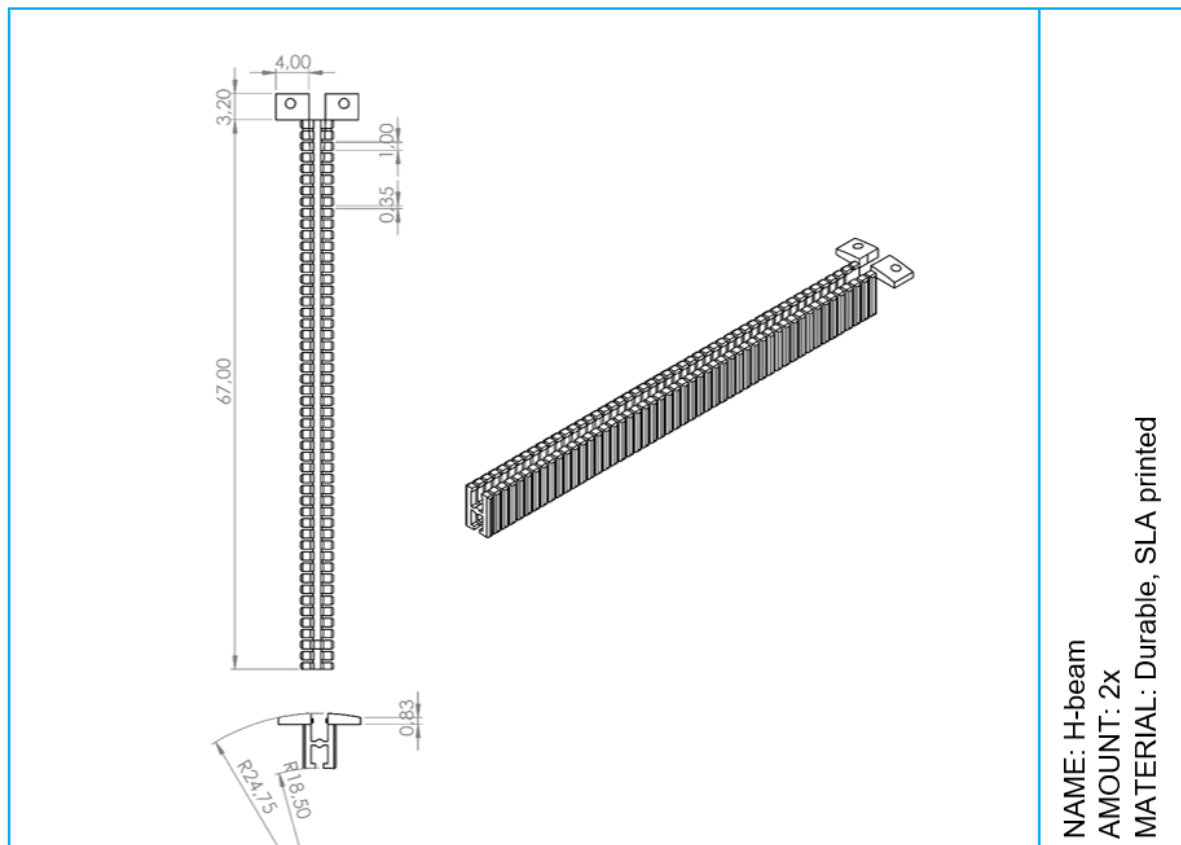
Construction drawings of the H-beam - 3D Printed prototype
